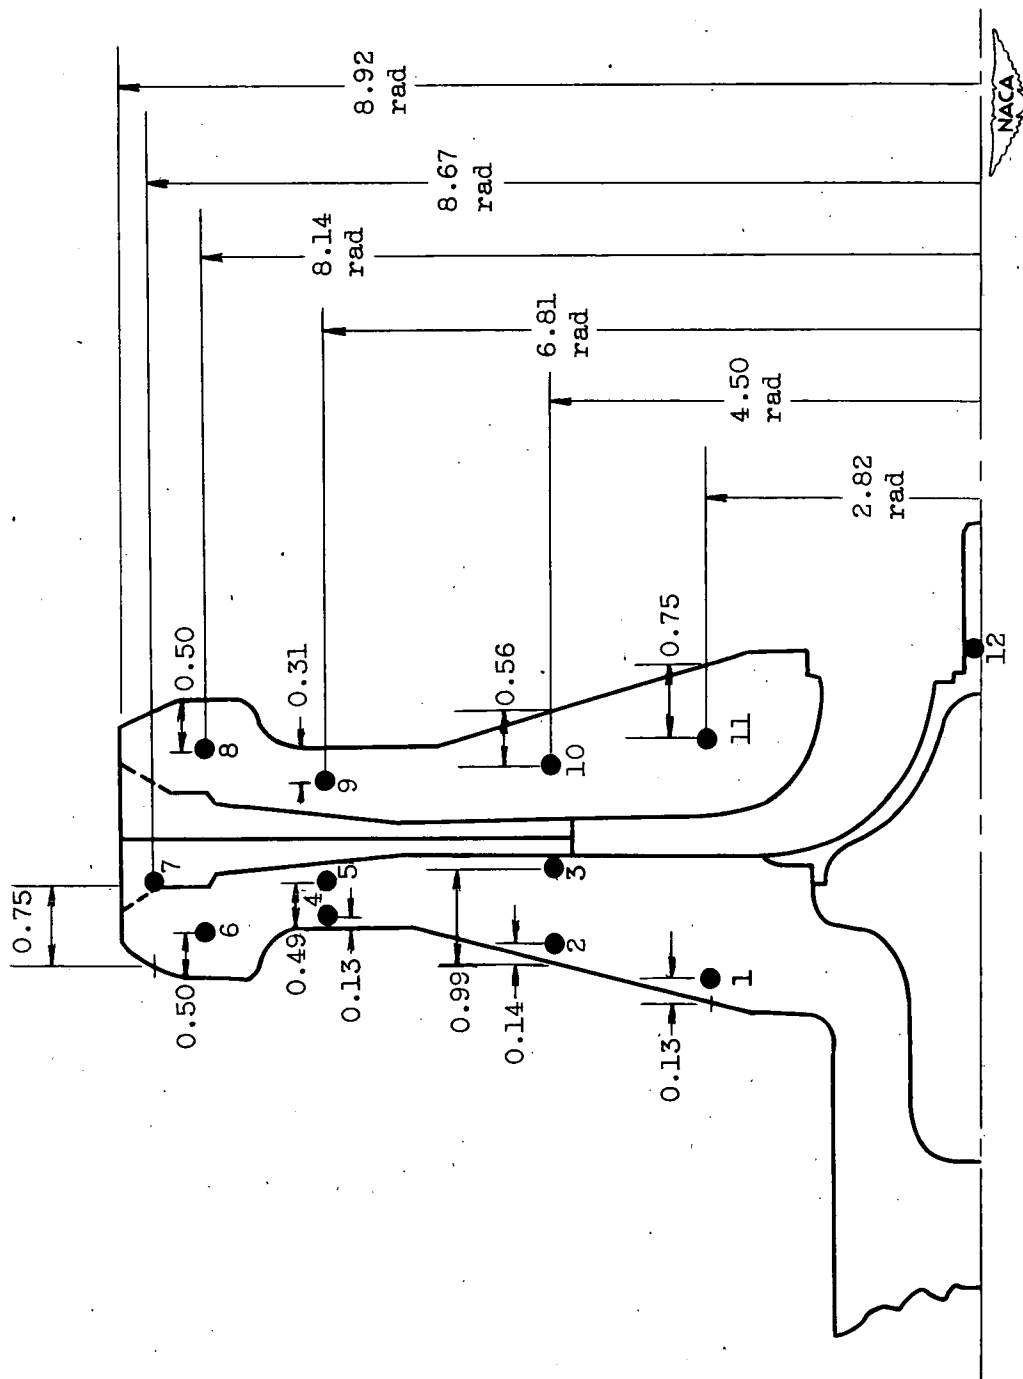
Turbine disk thermocouple locations. (All dimensions are in inches.)
